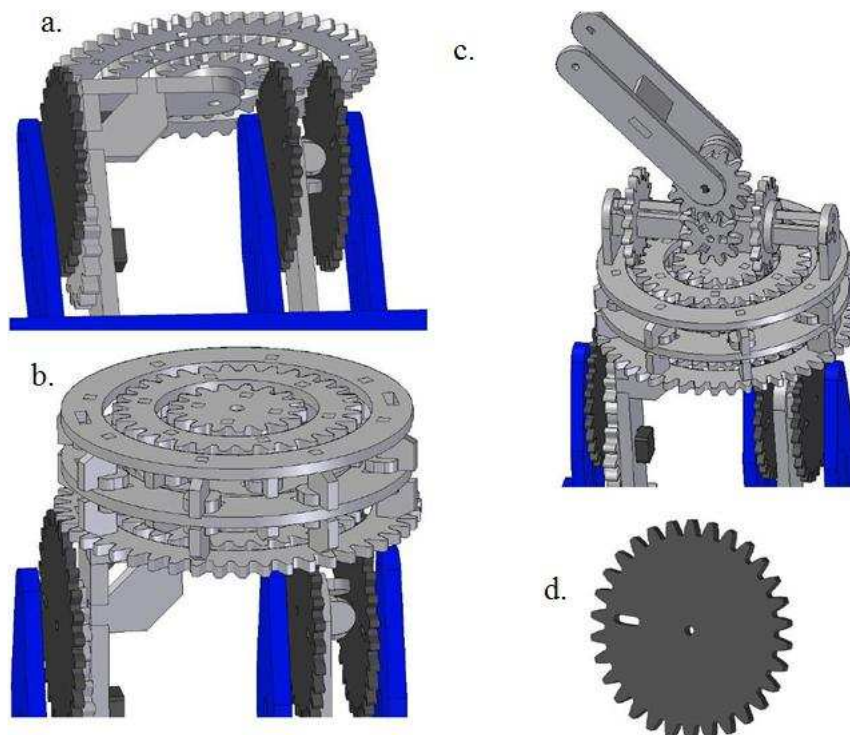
(a) Gear meshing at bottom of wrist concentric gearbox, (b) Top view of wrist concentric gearbox, (c) Complete Wrist and (d) Secondary follower gear with slider slot
